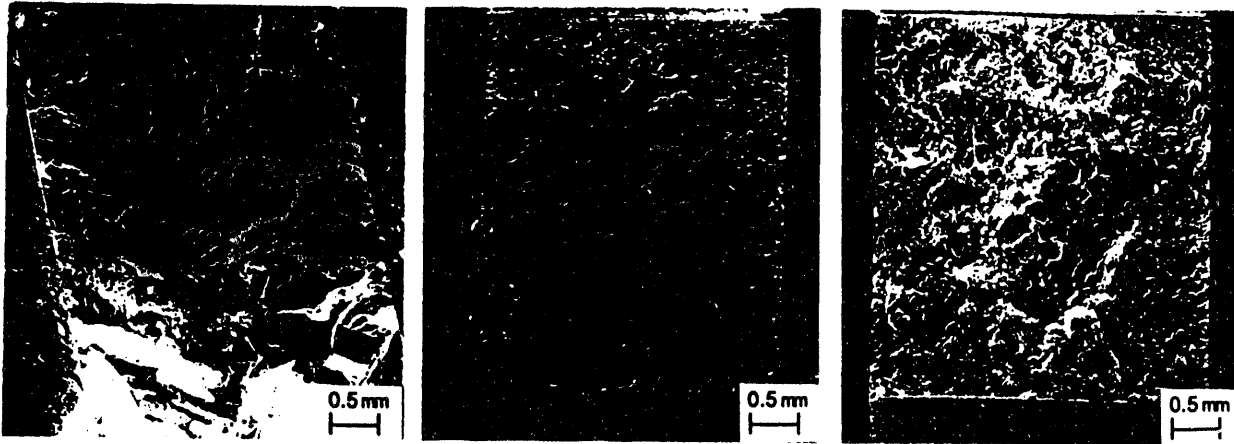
Fracture surfaces of, left to right, AM-2, DS-T, and IM castings.
